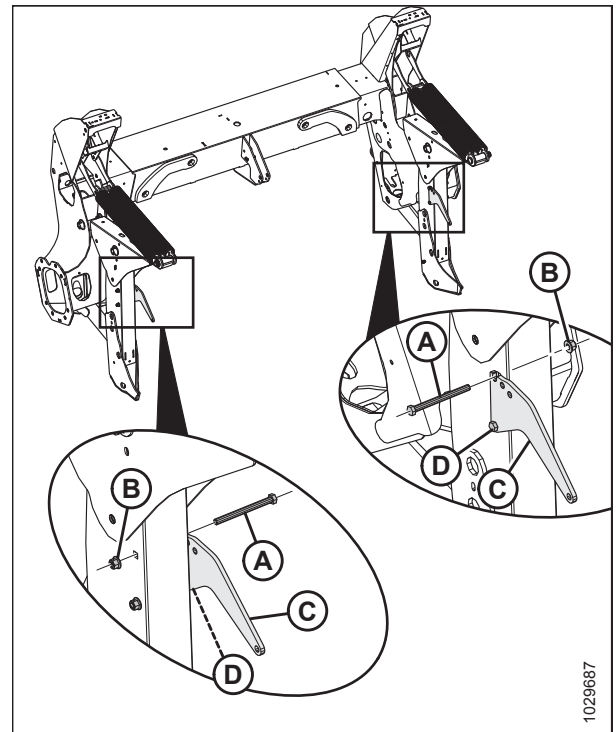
Setting for R216 SP Disc Header without DWA Option
